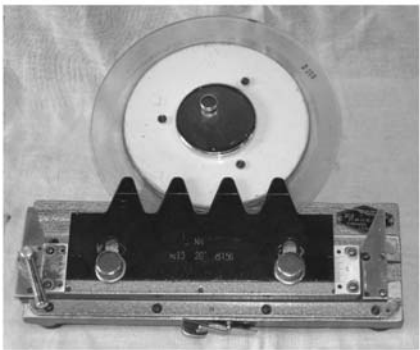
Device for profiling a tooth involute's wheels (SojuzVuzPribor, 1960)
